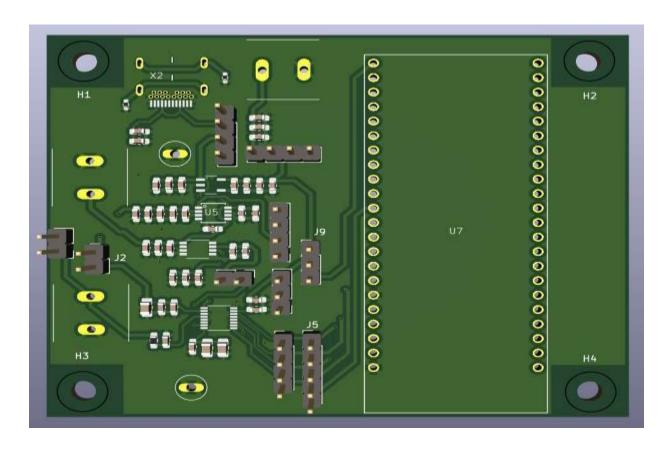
Top view of 3D design of PCB Figure 23:- Top view of 3D design of PCB
